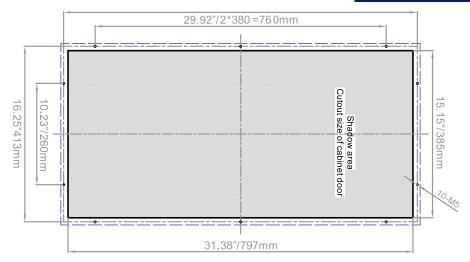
Dimensions for cut-out in enclosure door for the ACT-VCC-3000-DC
